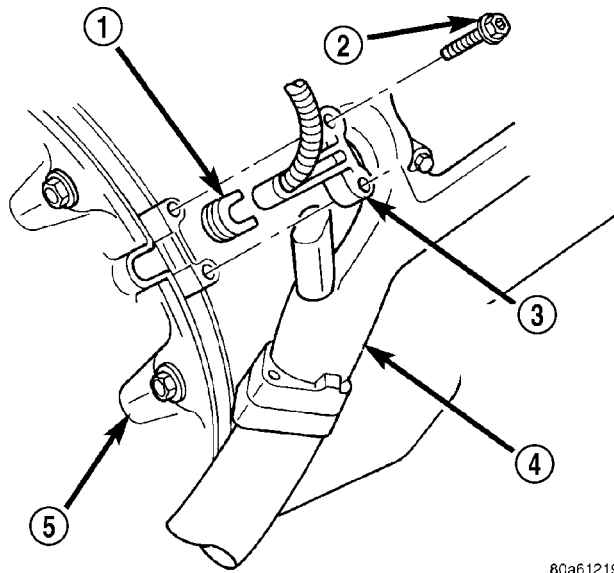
CKP REMOVAL / INSTALLATION - 5.7L V-8
